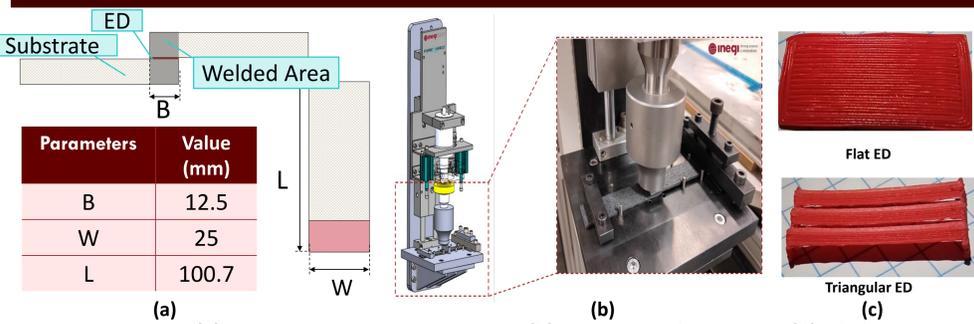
(a) Joint geometry and dimensions, (b) Experimental setup, and (c) ED shapes
